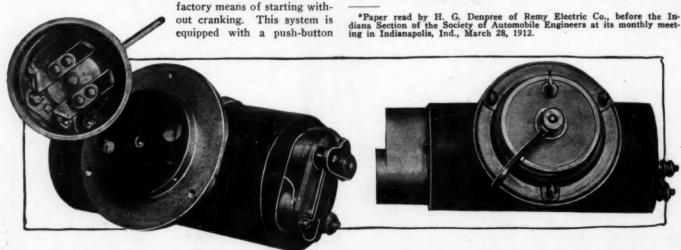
Remy coil switch and contacts and vibrator end uncovered. Exterior view of the Remy vibrating coil assembled
